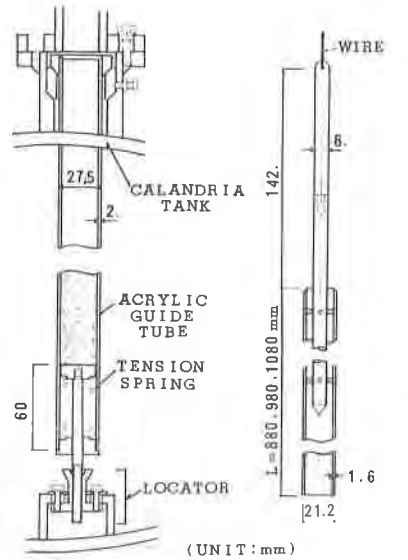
GUIDE TUBE MODEL AND SHUT-OFF ROD MODEL
